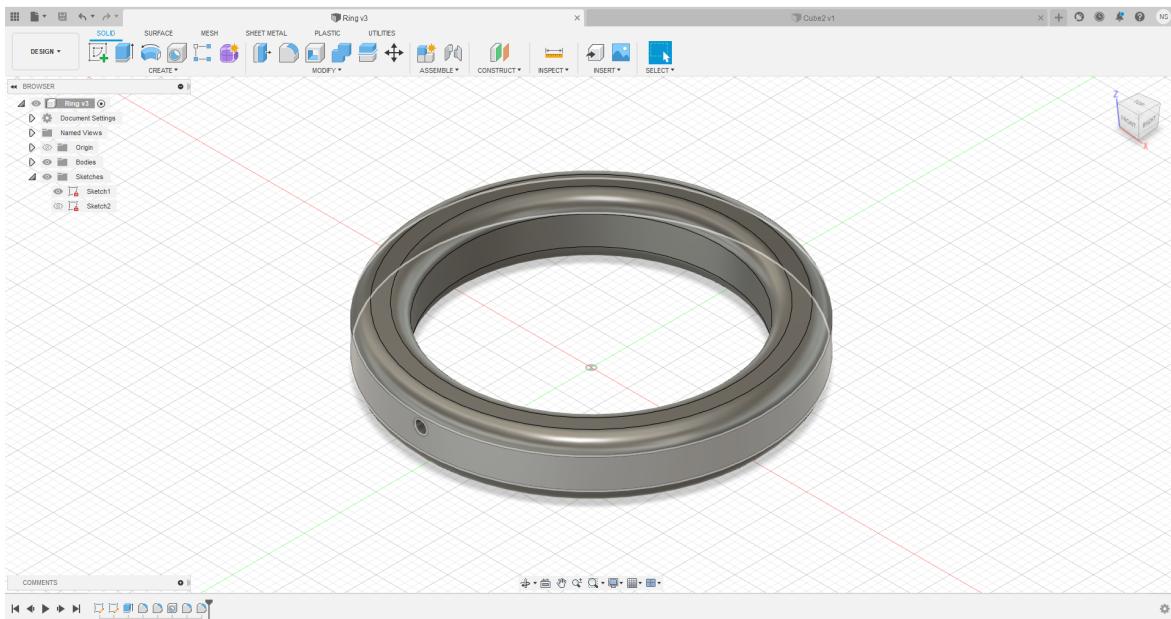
Fusion360 view after inner edge smoothening by 1mm fillet
